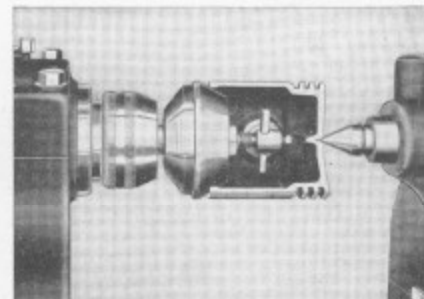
Cross Section View showing Application of the Piston Adapter.
